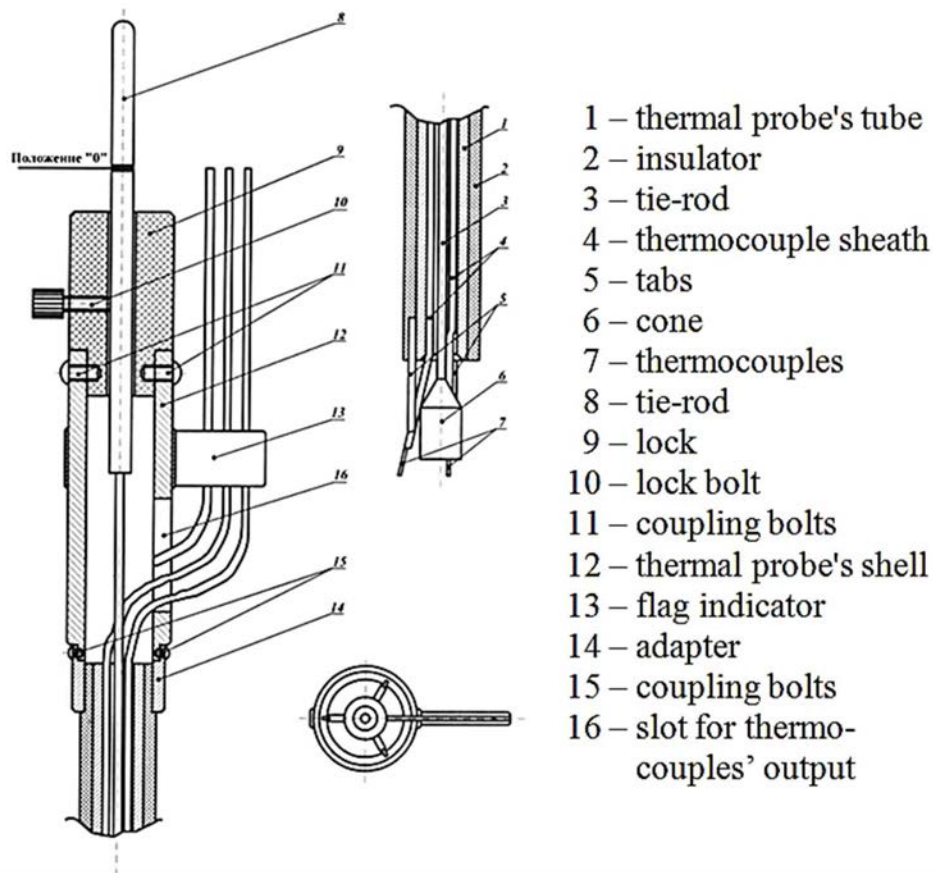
Design of movable thermocouple probe temperature measuring inside central rod.
